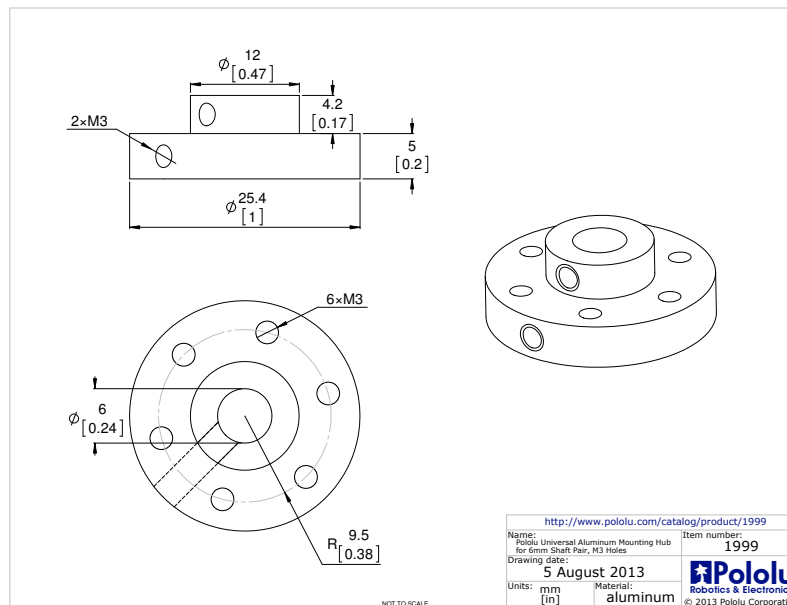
Overview of the Pololu Universal Aluminum Mounting Hub for 6mm Shaft, M3 Holes
